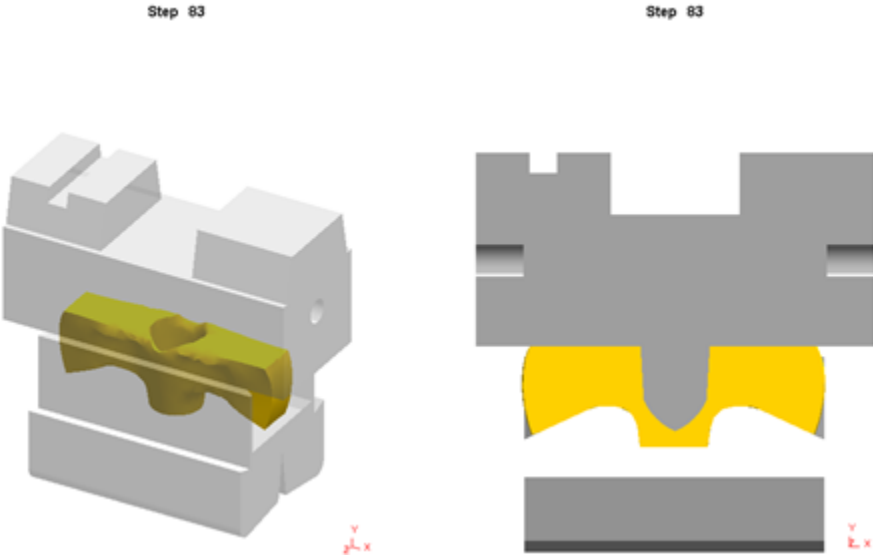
Sectional view of work piece lower die, and upper die setup after forging process
